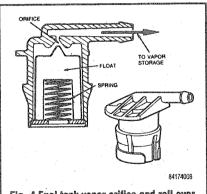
Fuel tank vapor orifice and roll over valve assembly
